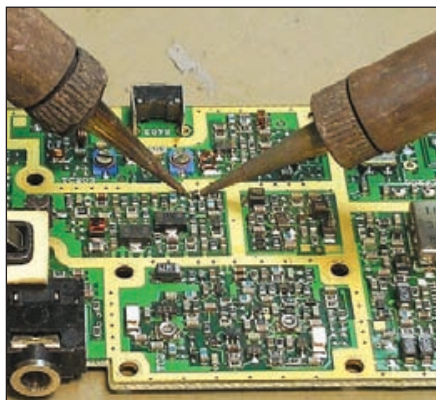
Stephen Wimmer, WUØF uses a pair of 25 W soldering irons to heat both ends of a surface mount component at the same time to remove the component from the circuit board.
